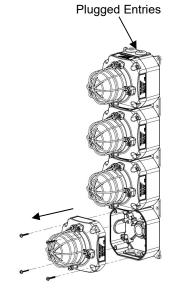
Accessing the Enclosure, PCBA & Terminals
